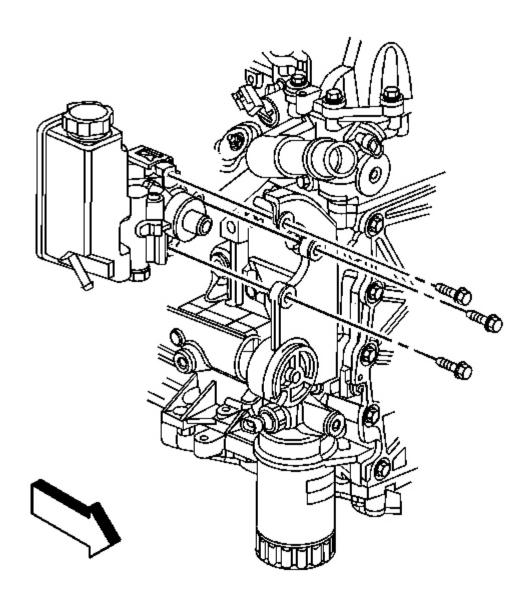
View Of Power Steering Pump & Mounting Bolts Courtesy of GENERAL MOTORS CORP.
